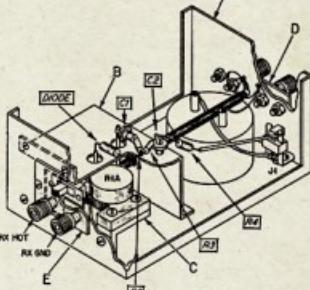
Wiring view of the Antennoscope-54. The layout should be followed as closely as possible.
